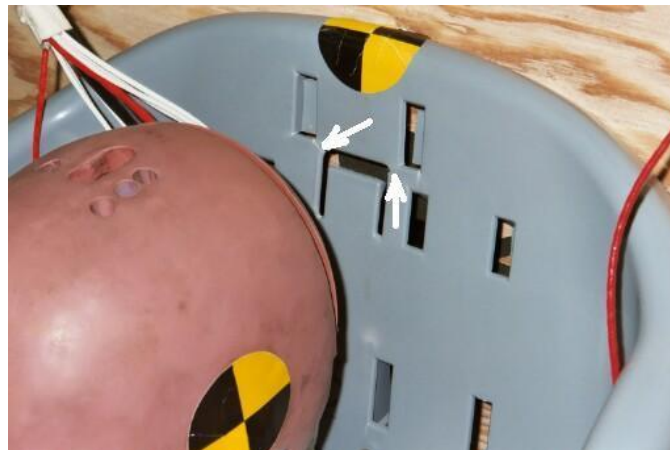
Small nonstructural cracks in the CRS shell detected after test 11-3-04.
